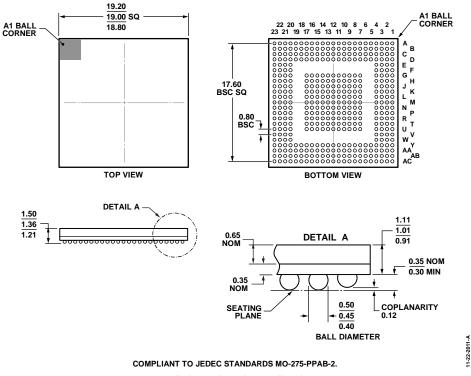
425-Ball Chip Scale Package Ball Grid Array [CSP_BGA] (BC-425-1) Dimensions shown in millimeters
